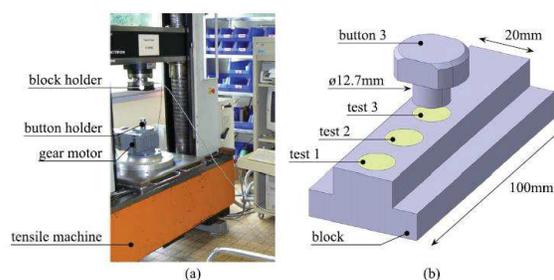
(a) Testing device and (b) specimen illustration with main dimensions, in reversed position [4].
